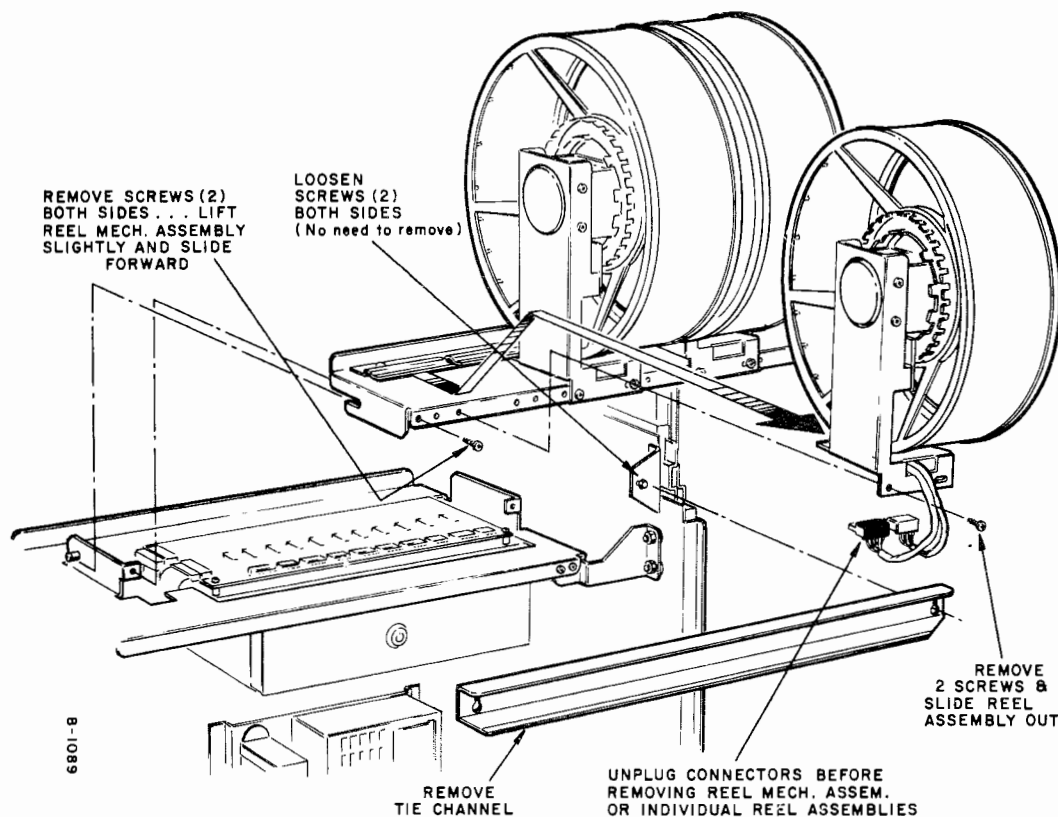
Replace Reel Mechanism and Motor Assemblies
